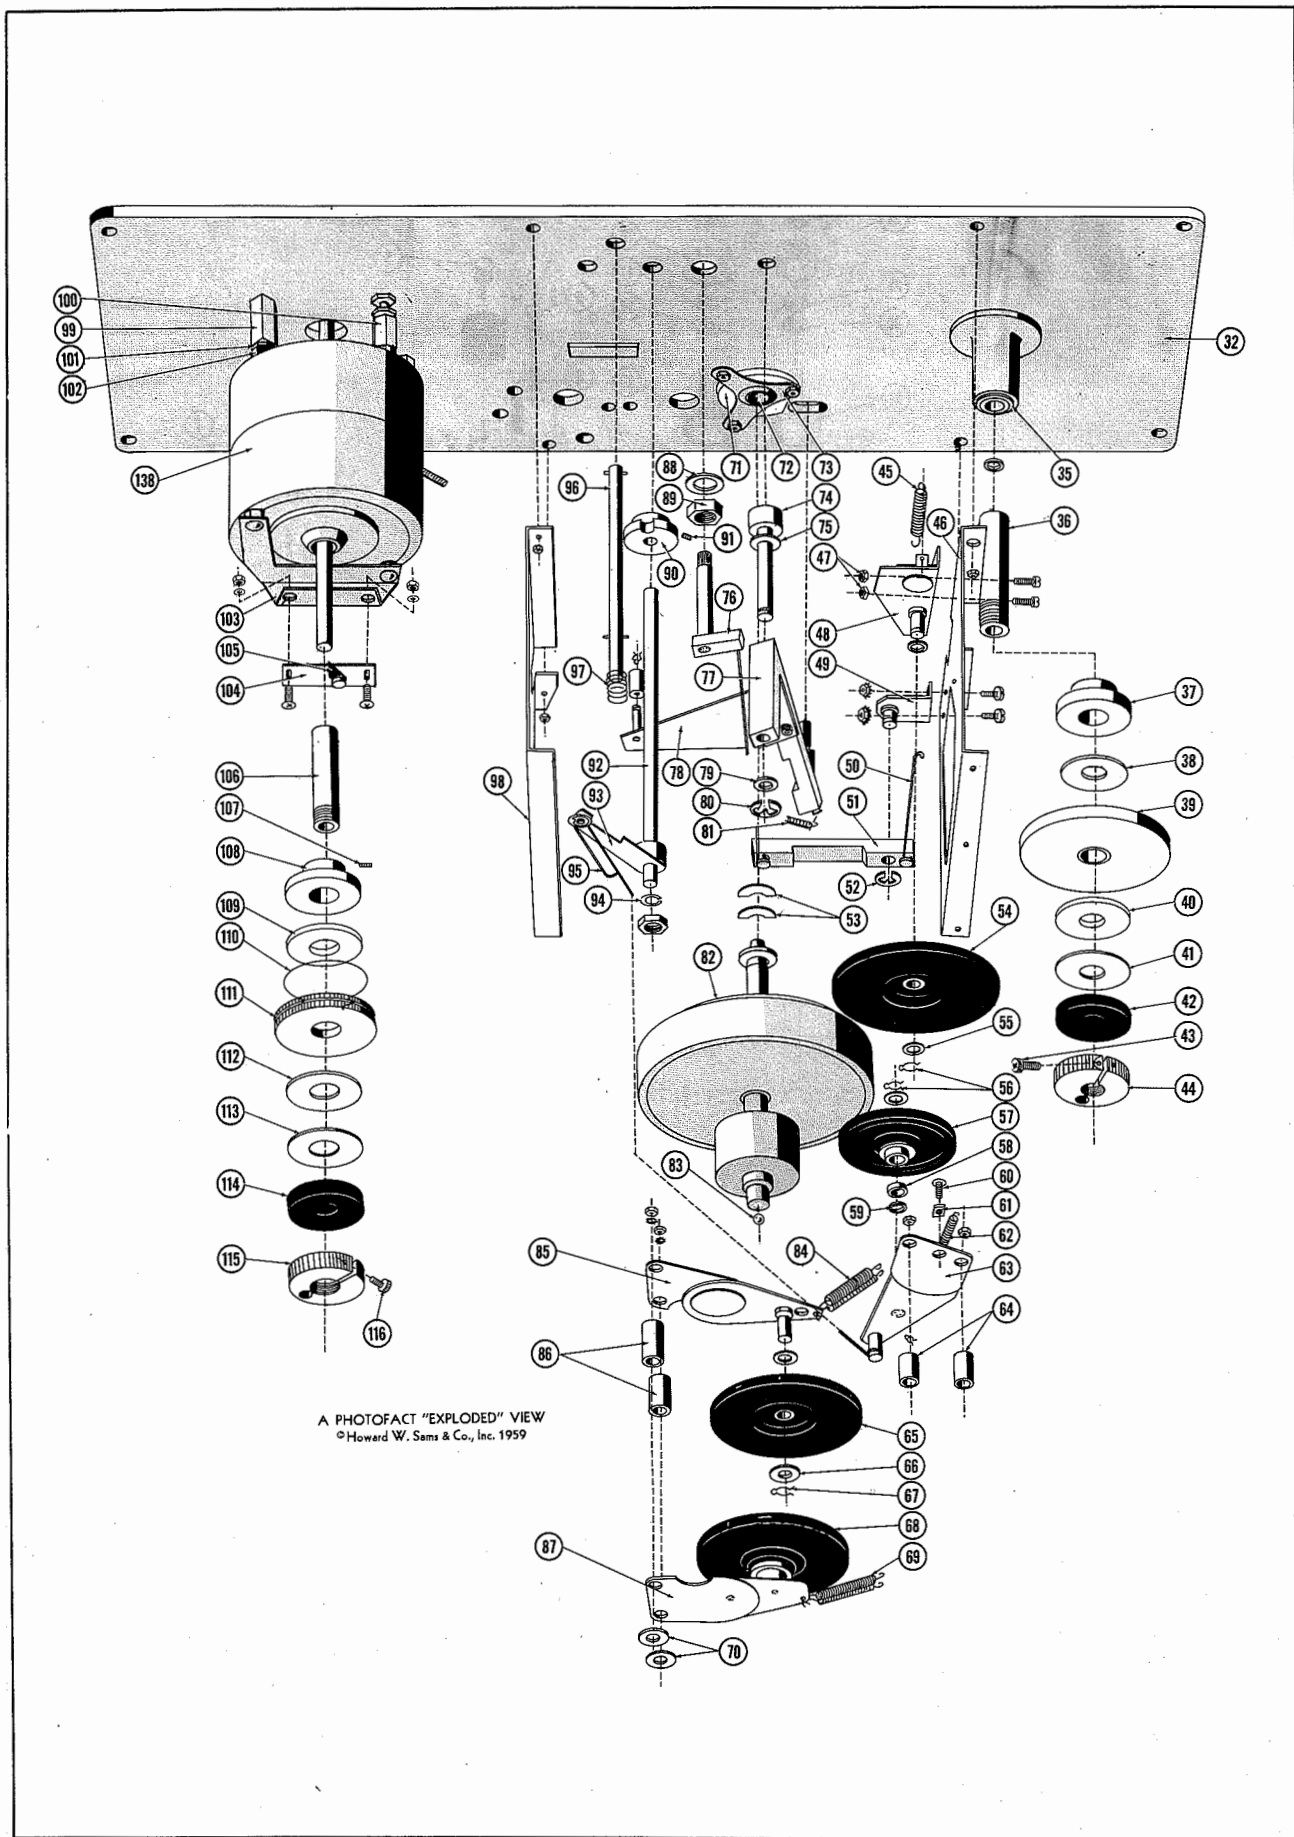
B EXPLODED VIEW OF PARTS BELOW FRONT PLATE
